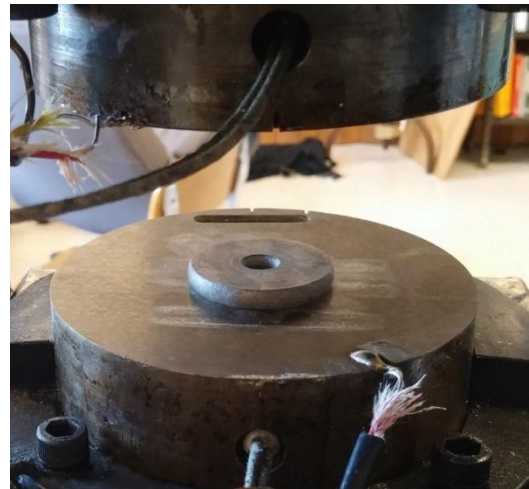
A ring specimen shown after compression. Note the change in both inner and outer diameter dimensions.
